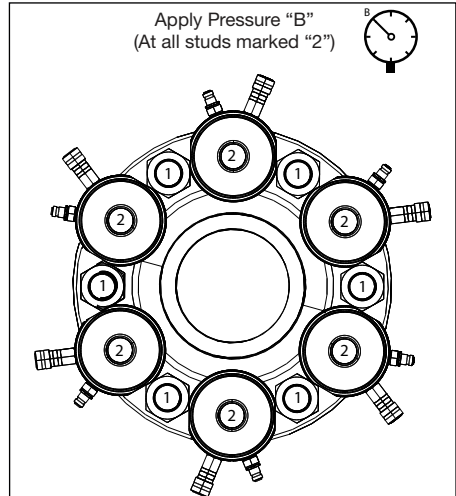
, TENSIONER ARRANGEMENT, SECOND PASS - TYPICAL (50% TENSIONER COVERAGE)
